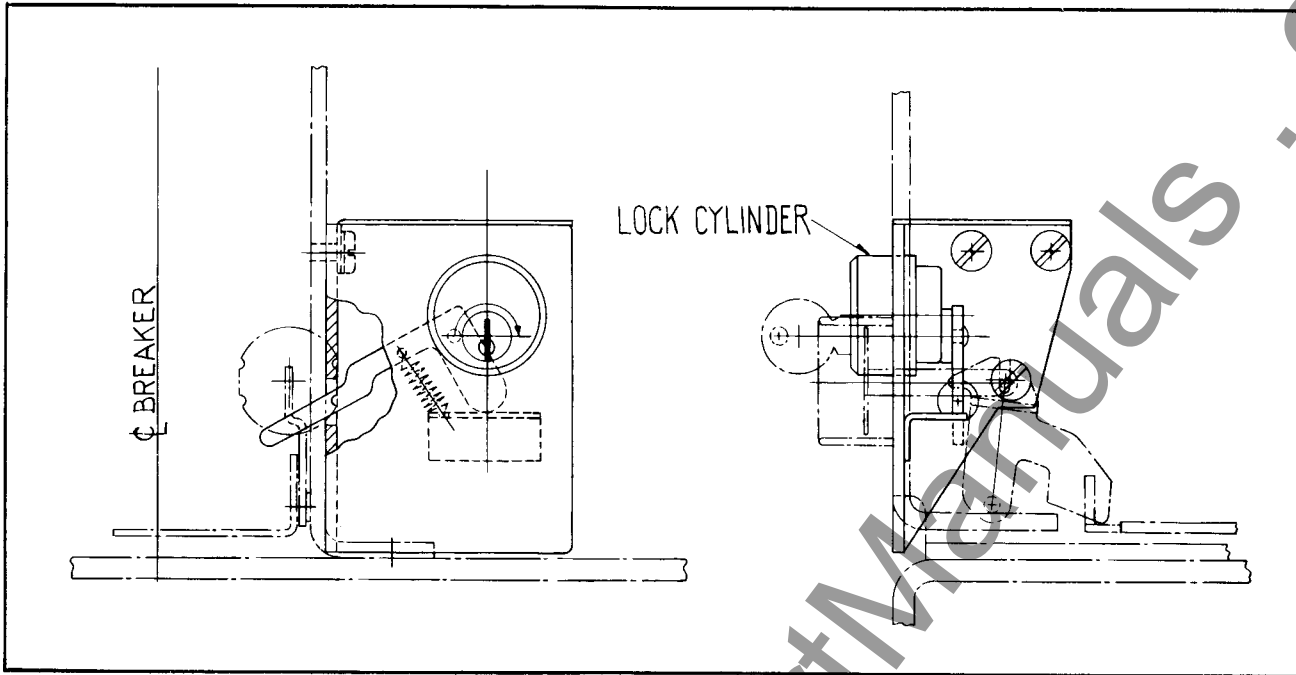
Key Lock or Key Interlock Attachment For Fixed Bkrs. - Construction Details
